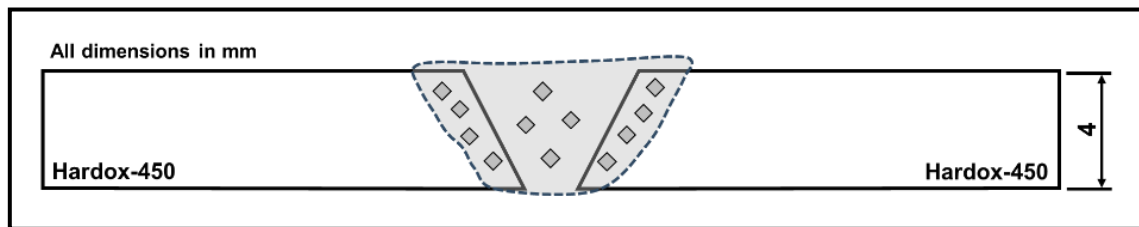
Hardness measurement's location of the SMAW and FCAW welded joints (All dimensions in mm).
